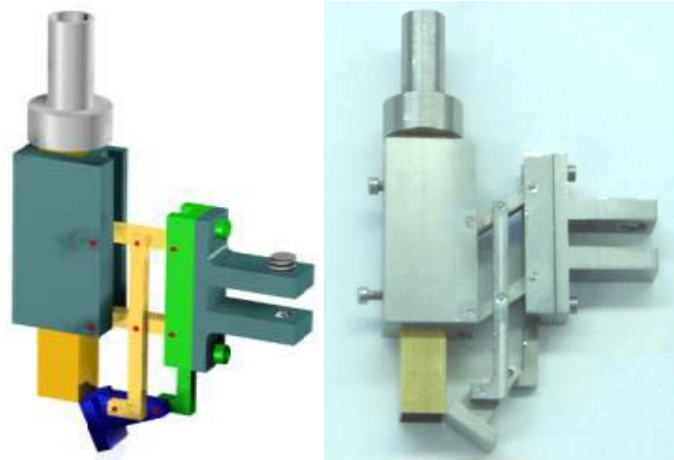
Design and two view of the current prototype of the pivoting nozzle assembly
